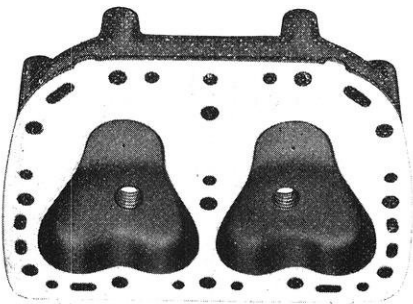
DETAIL VIEW OF RICARDO CYLINDER HEAD.
